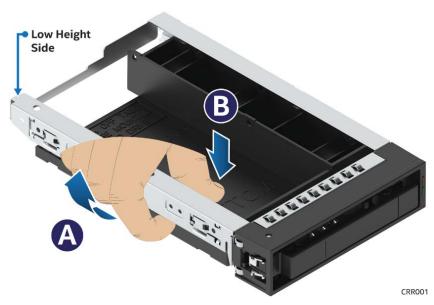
3.5" Drive Carrier Assembly – Drive Blank Removal
